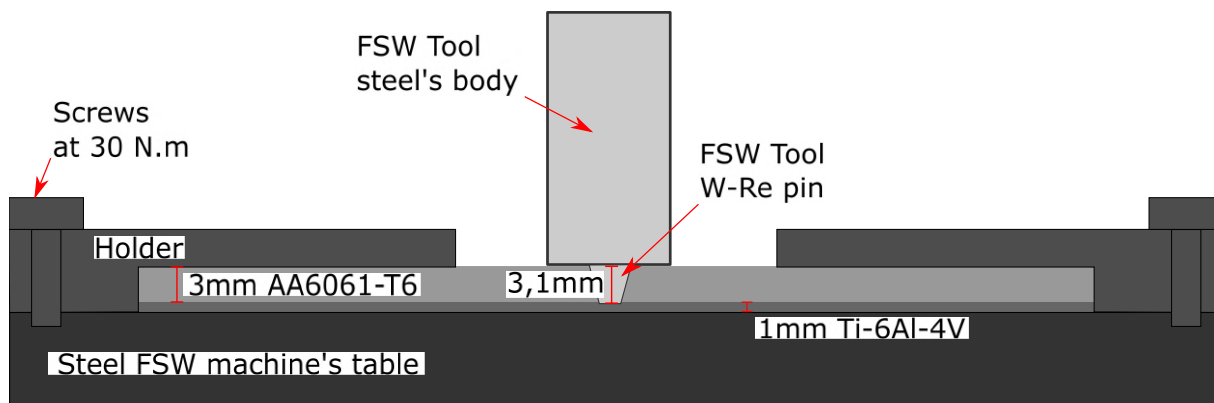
Schematic of the welding setup for dissimilar AA6061-T651 and Ti-6Al-4V.
